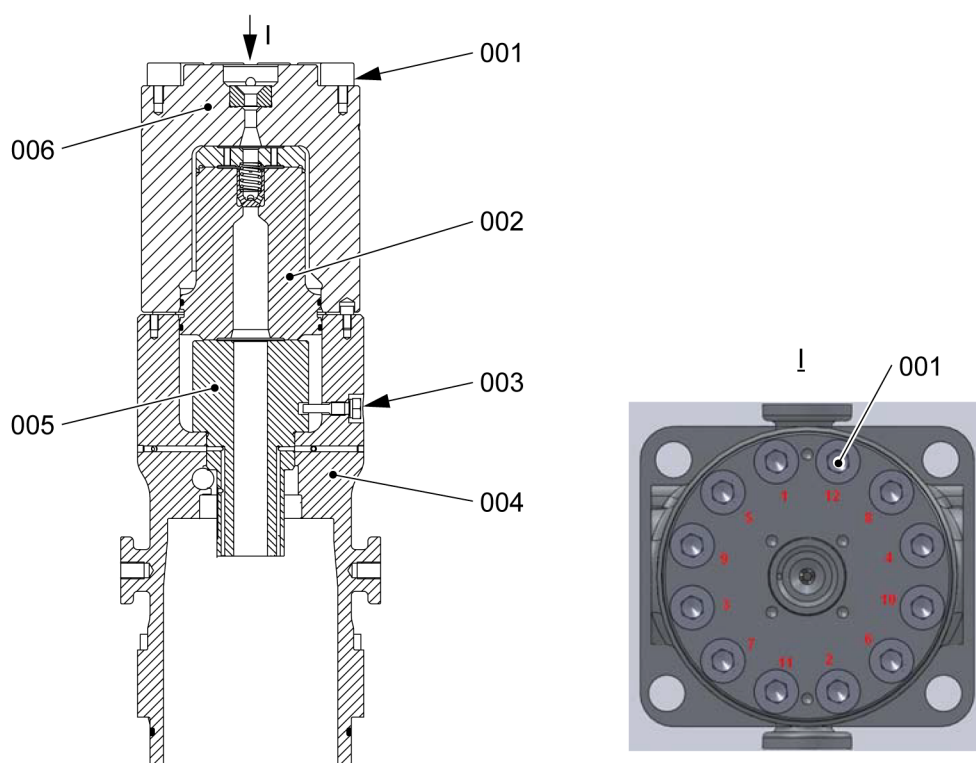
Fuel pump (X4) - Non-return valve assemble
